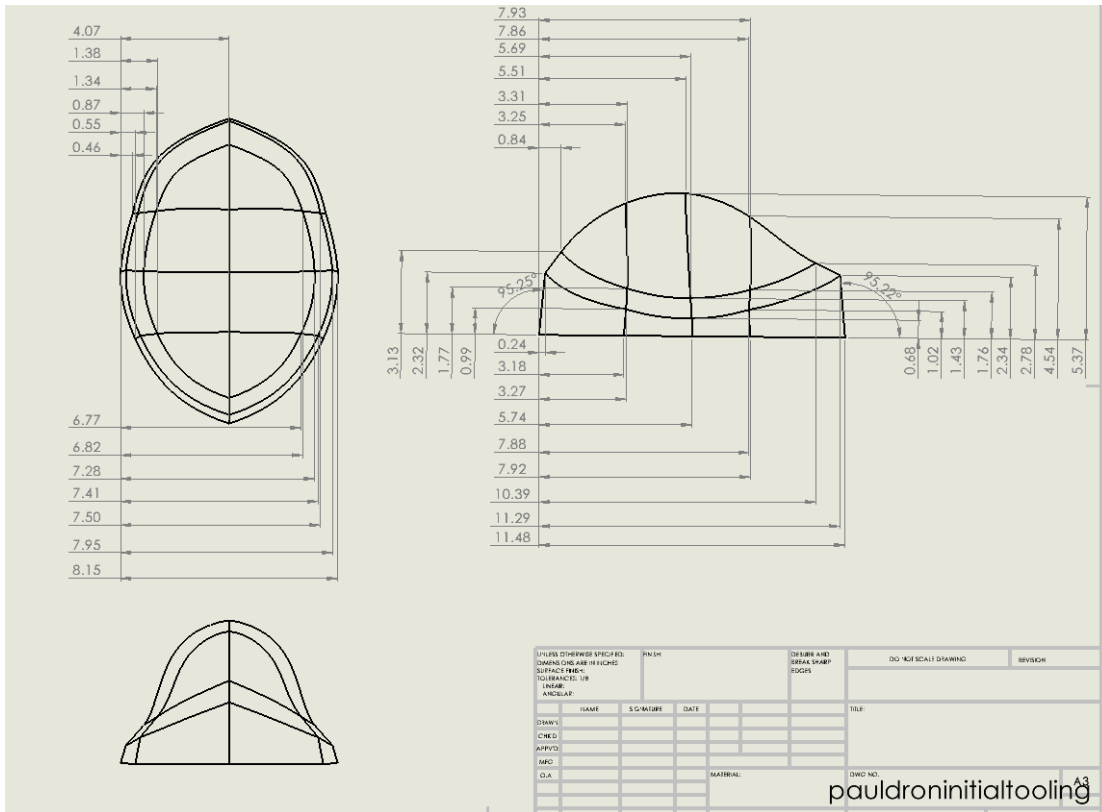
Initial Pauldron Tooling Model Engineering Drawing
